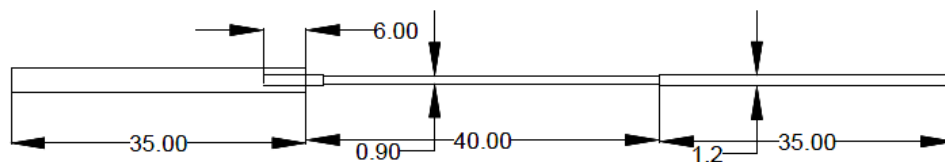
Schematic diagram of specimen for uniaxial test (All Dimensions are in cm)
